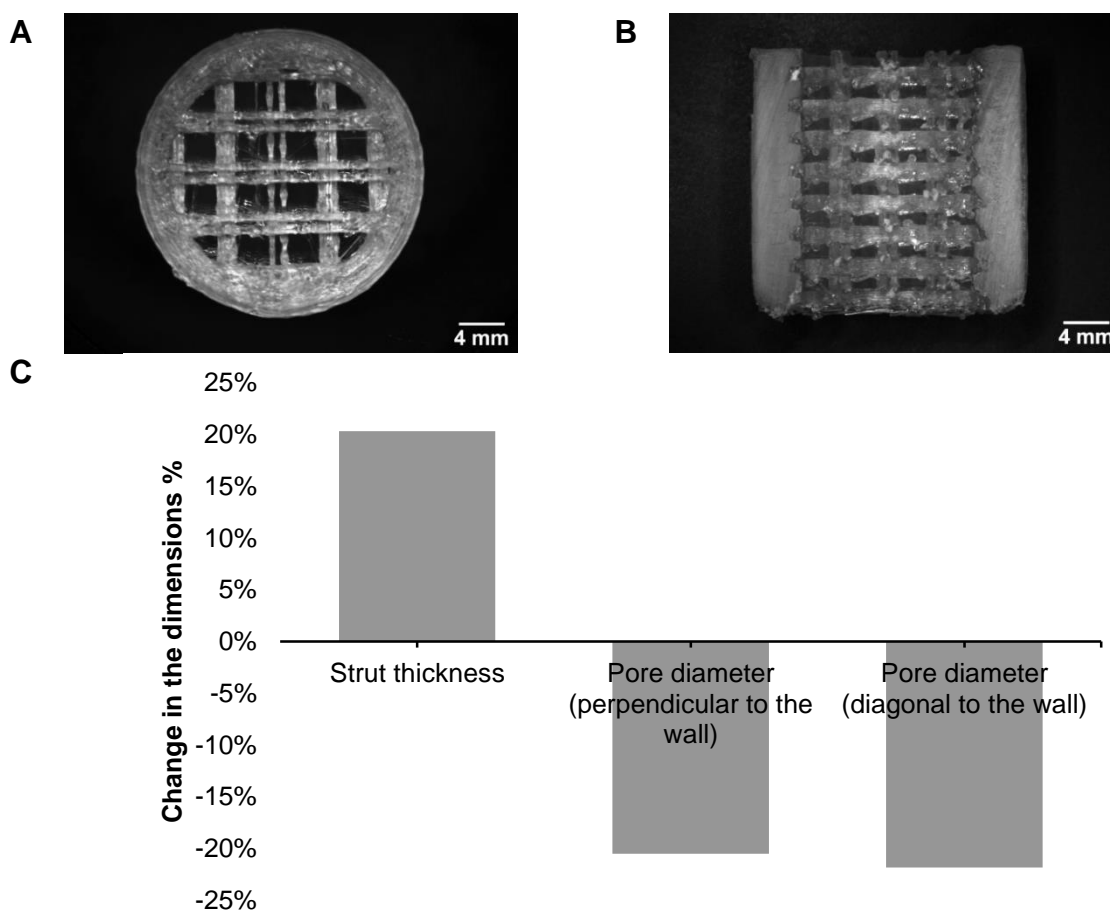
PLA negative mould fabricated on RapMan. Representative bright field images of the first two layers (A) and a cross section of the whole printed mould (B). Illustration of the deviation between the CAD designed mould and the FFF printed (C).
